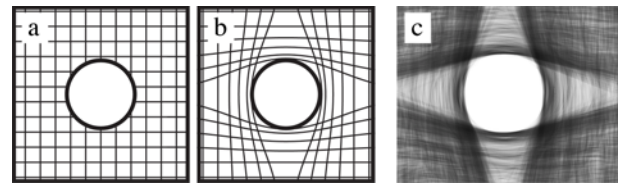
Reinforcement structure of drilled (a) and moulded specimen (b); X-ray picture of glass-fibre/polypropylene weave with a moulded hole.
